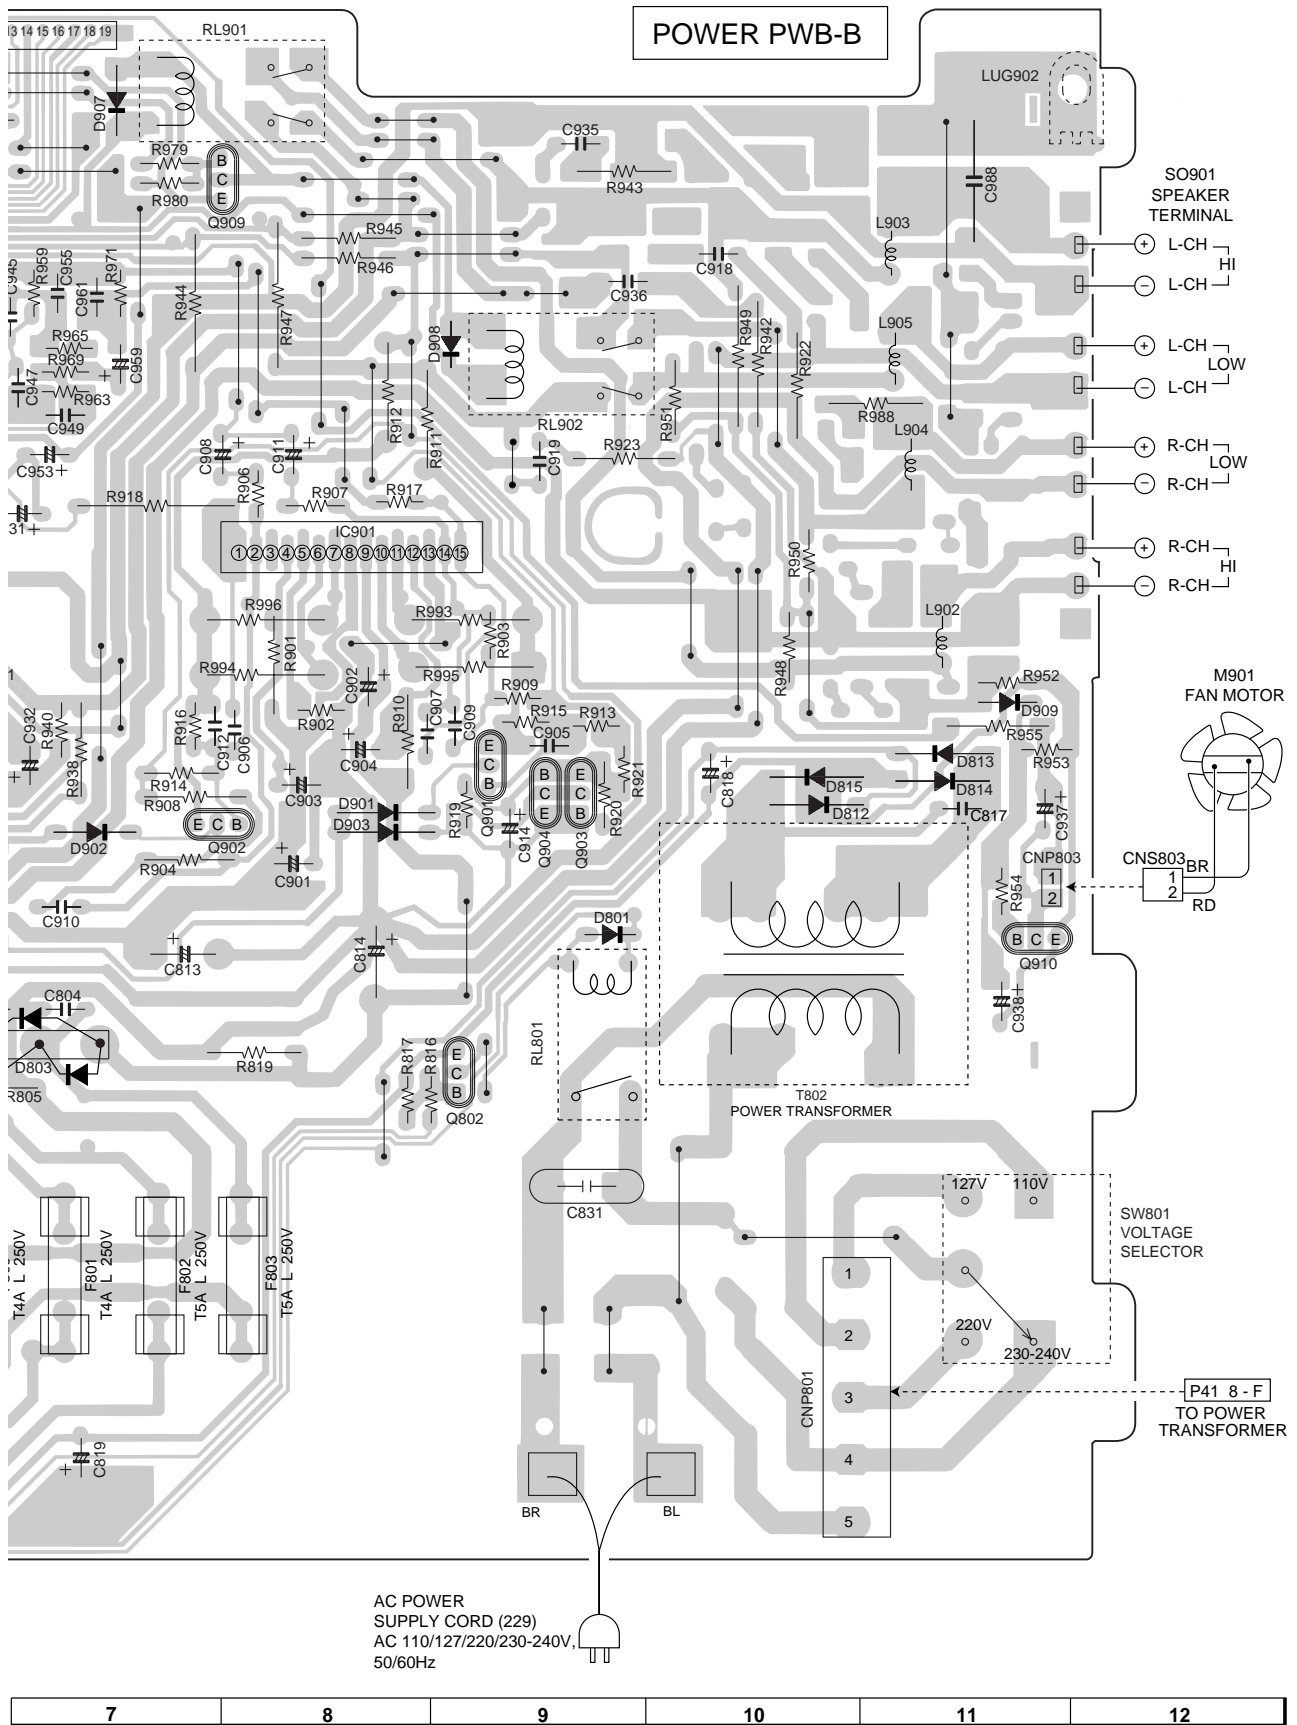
WIRING SIDE OF P.W.BOARD (6/9)
